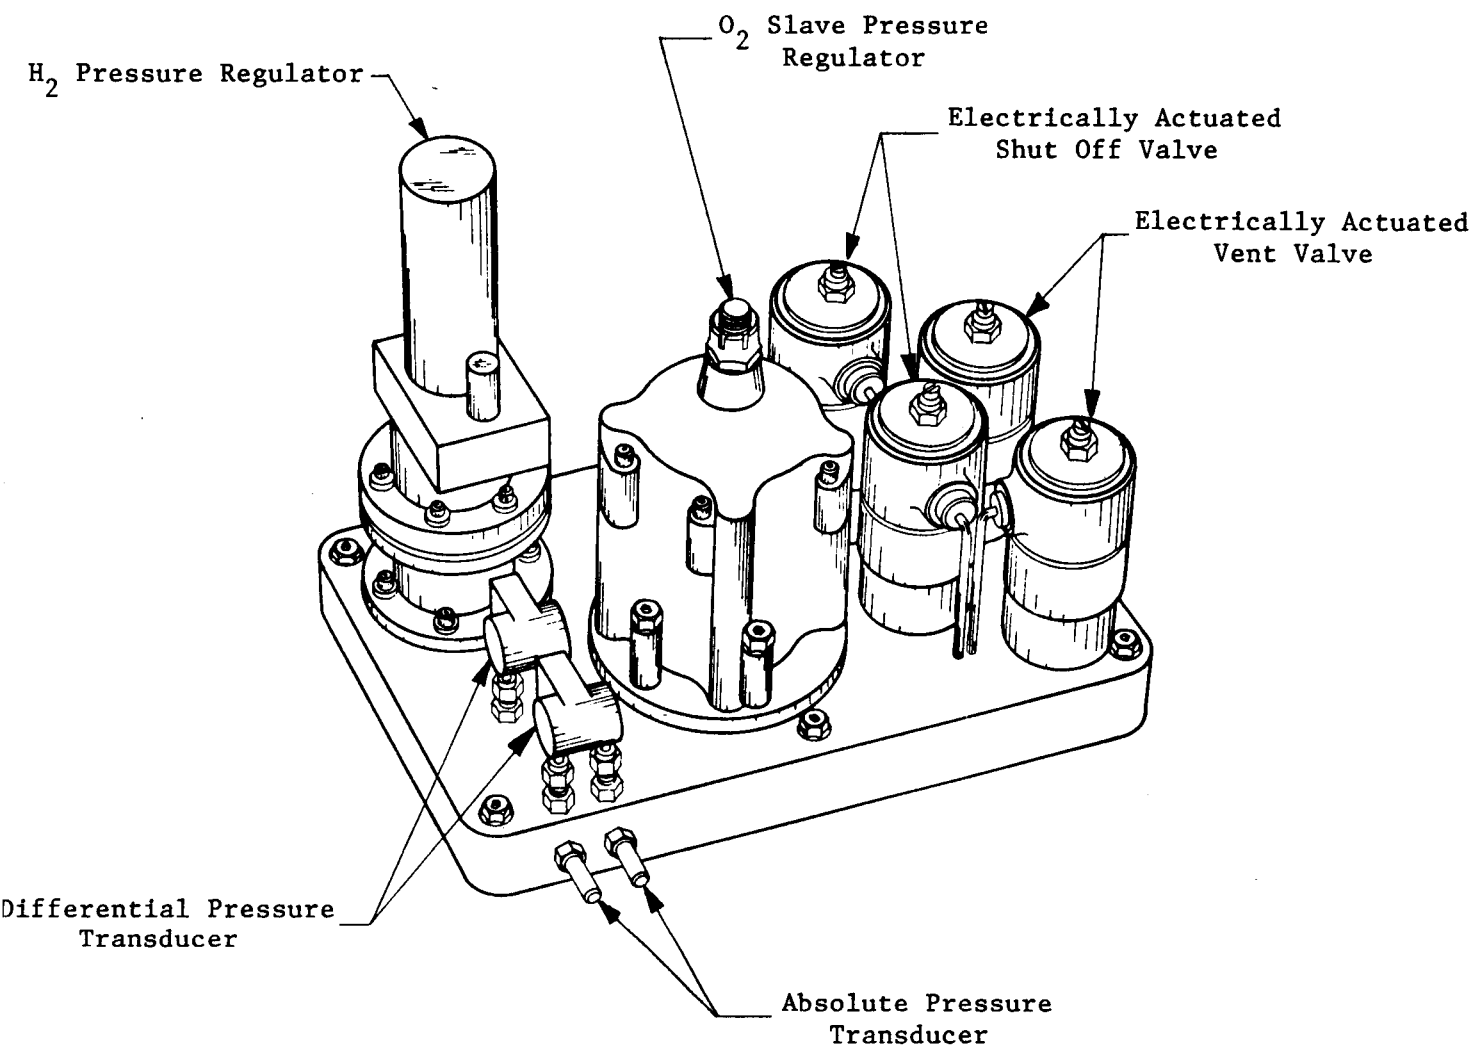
PRESSURE CONTROL ASSEMBLY RFCS-SSP, ISOMETRIC VIEW
